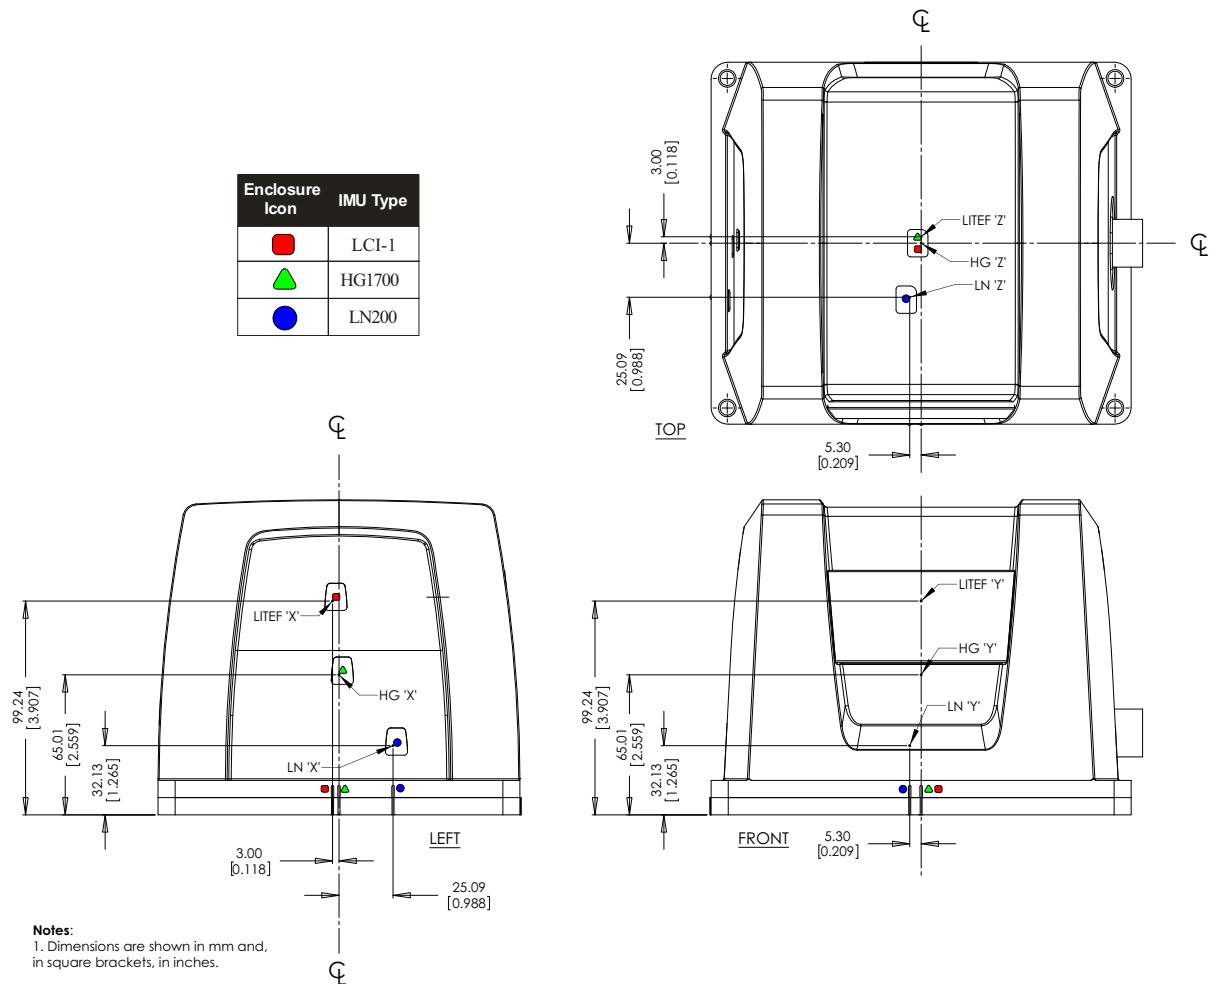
Universal IMU Enclosure Top/Bottom Dimensions
